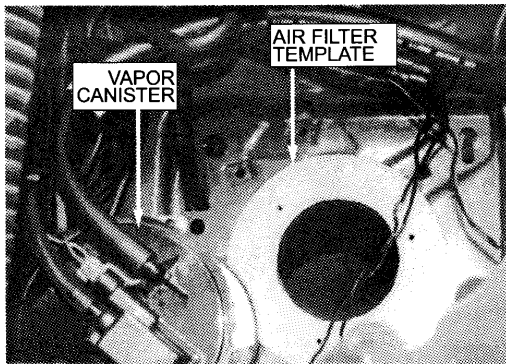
/ Relocated vapor canister and new position of air filter [Top view of driver's side wheelwell]
